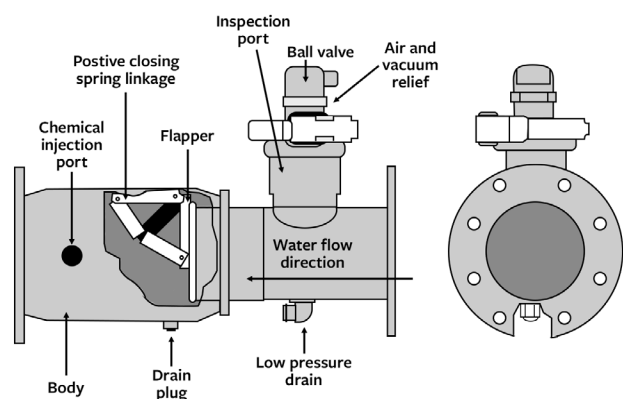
Schematic drawing of typical irrigation pipeline check valve.
